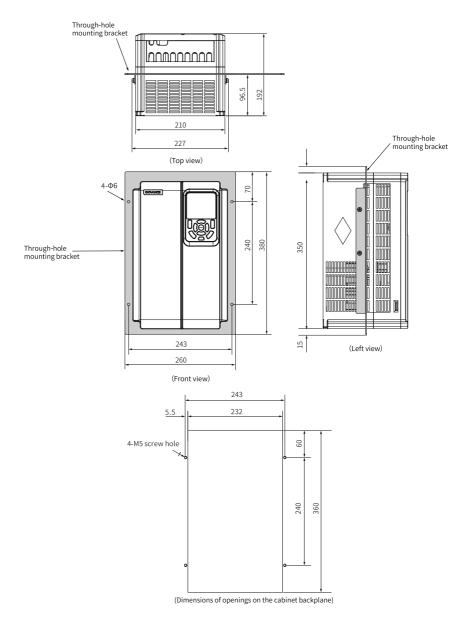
MD500-AZJ-A1T5 through-hole mounting bracket and cut-out dimensions (mm)
